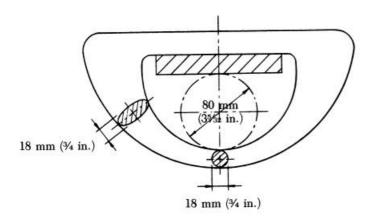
Mounting Hole Pattern in Landing Gear Support Bracket
